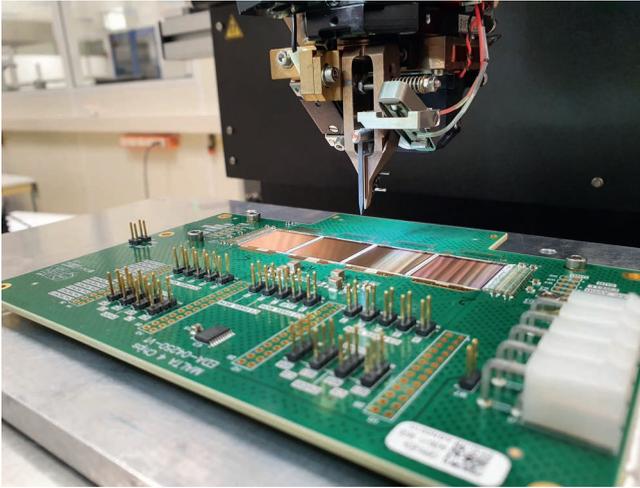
Image of an assembled and wire-bonded MALTA quad-chip board at the Bondlab at CERN. The wire bonding was performed through aluminium wedge wire-bonding. The bonding tool hovers above the four MALTA chips, arranged side by side on the PCB board.
